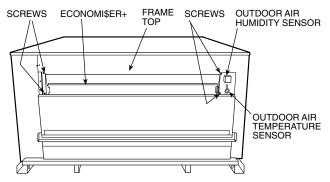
EconoMi\$er+ Assembled in Unit — End View (13 to 25 Ton Units)
